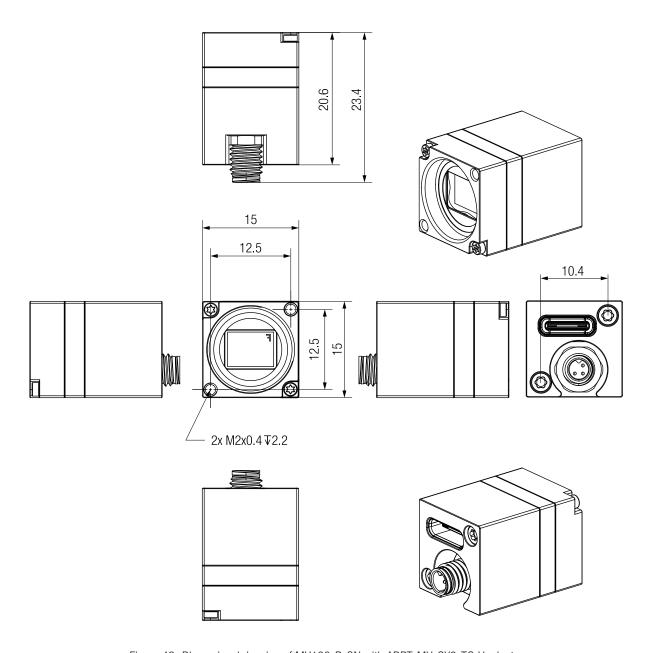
Dimensional drawing of MU196xR-ON with ADPT-MU-CX3-TC-V adapter
